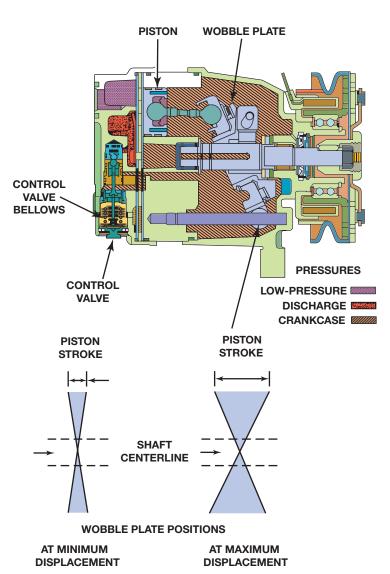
When the evaporator cools and low-side pressure drops, the piston stroke of a variable displacement compressor is reduced so that compressor output matches the cooling load.
